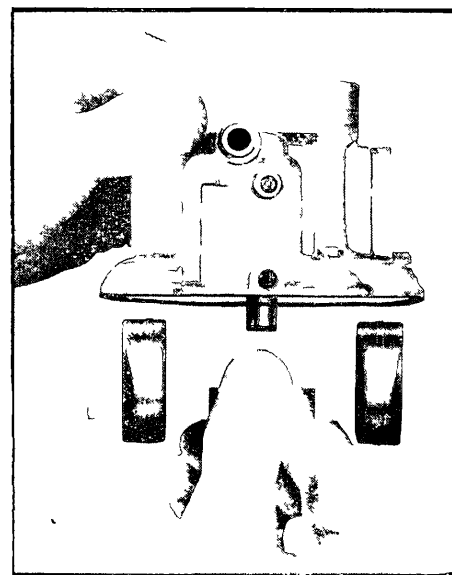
MM Checking float drop on Rochester BC carburetor. 1951-52 Pontiac Six
